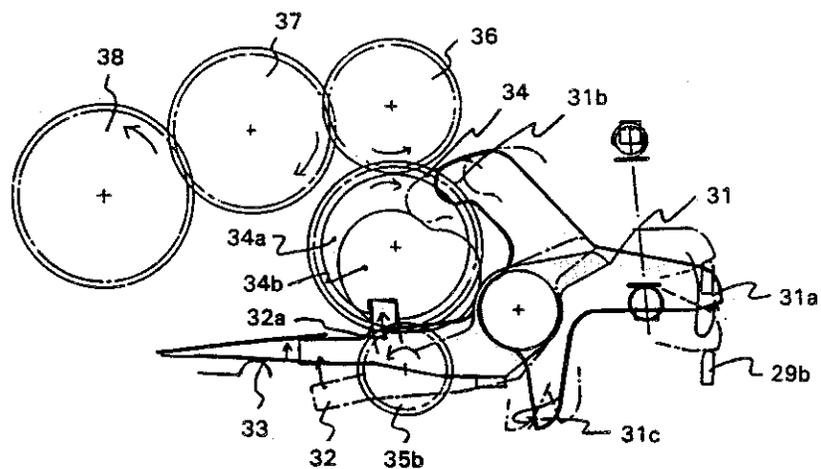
Winding (Upper) Assembly During Reverse Rotation (Winding)
